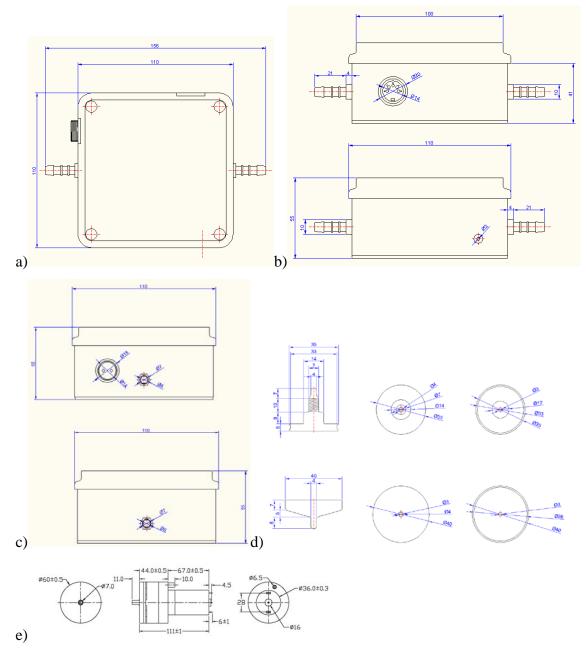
Mechanical drawing: a,b,c) Particle Sensing Unit; d) filter holder; e) mini vacuum pump
